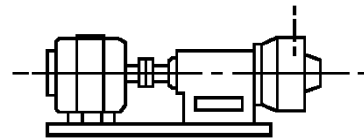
Frame-Mounted End-Suction Pump on Base Plate
